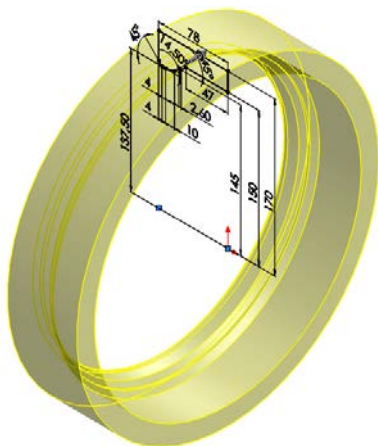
Rotational adding of material onto the sketch of the valve bearing
